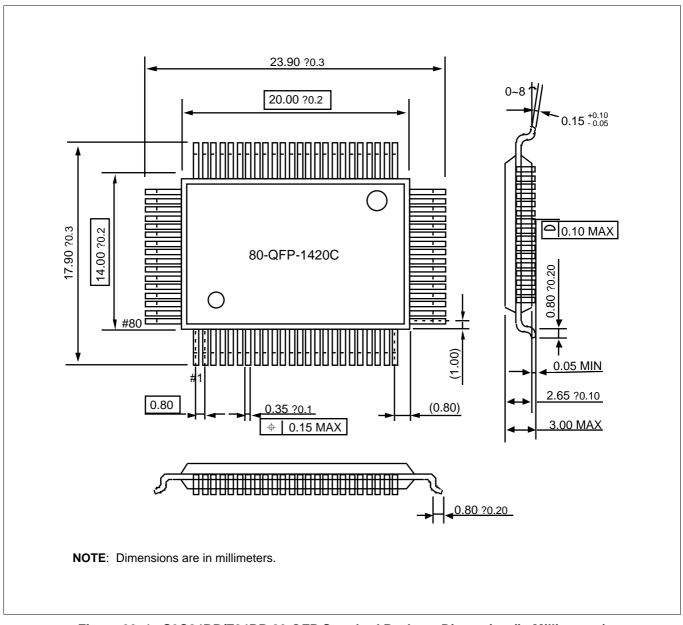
S3C84BB/F84BB 80-QFP Standard Package Dimension (in Millimeters)
